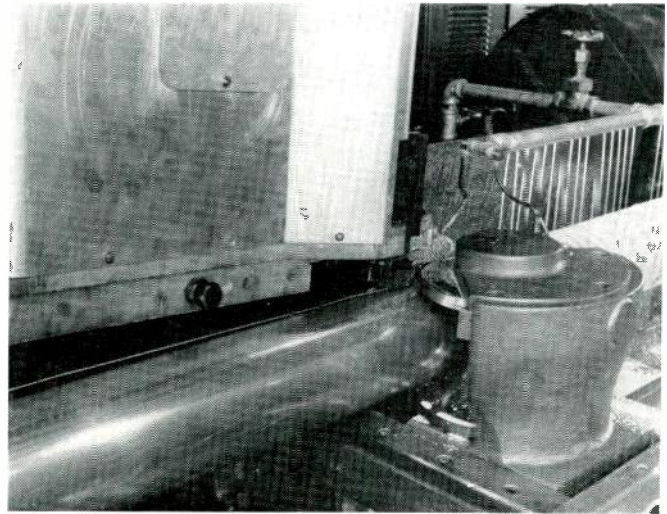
Closeup of welding contacts and squeeze rolls on large diameter irrigation tubing.
